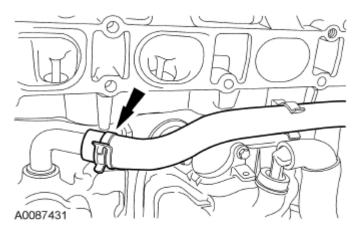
Locating Coolant Hose Courtesy of FORD MOTOR CO.
